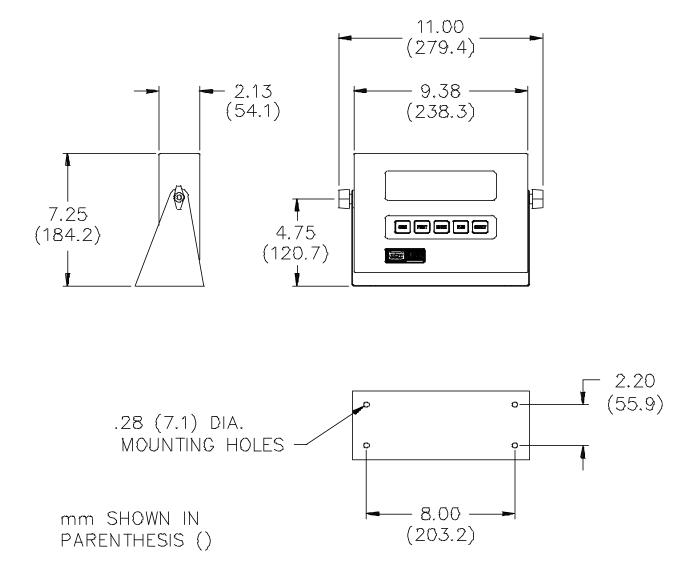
Model 450 indicator mounting holes and overall dimensions
